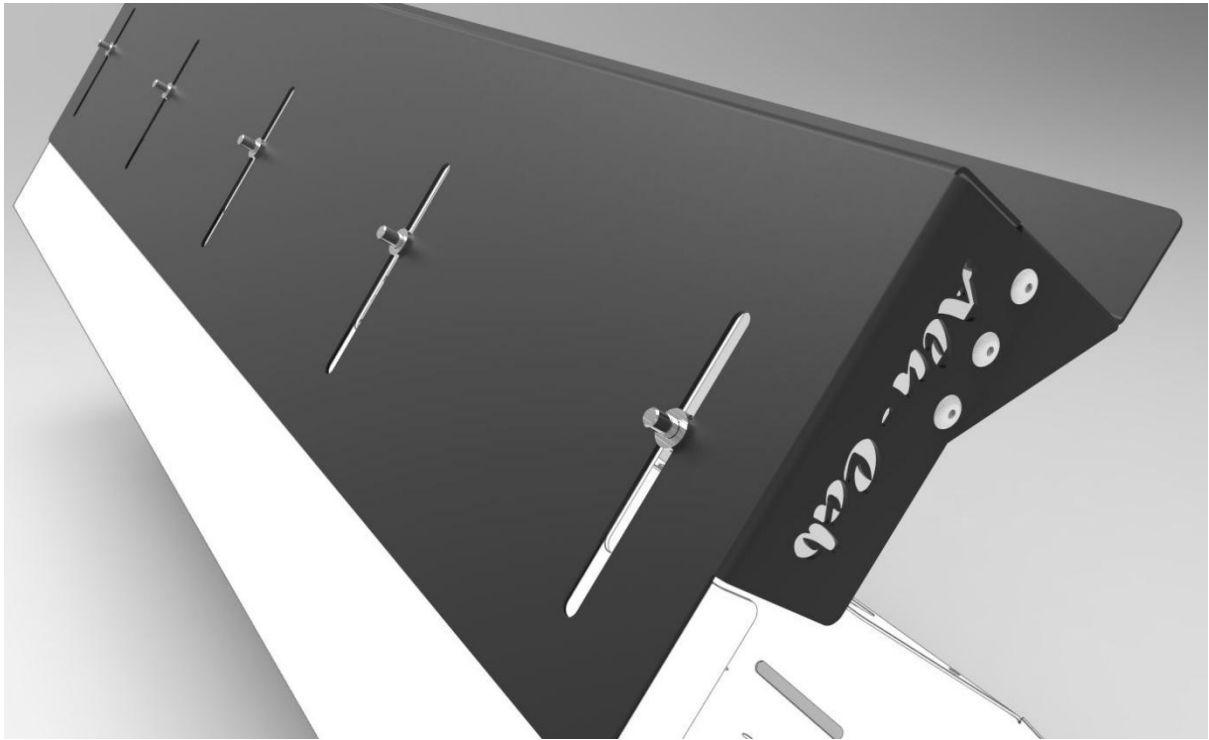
Place a washer on the bottom side of the Shelf Mount Bracket over each bolt
